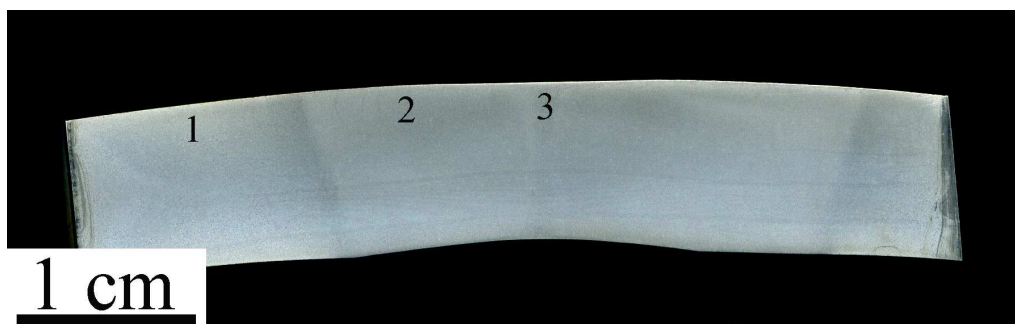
Weld segment from the X65HIC pipe after post-welding heat treatment. 1–base metal, 2–the affected area, and 3–the original location of the weld junction.
